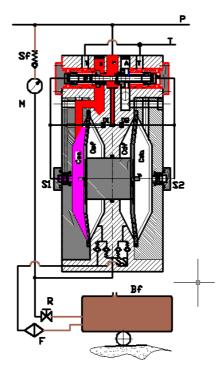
The membrane pump with directional control valve driven by check valve opening at stroke end
